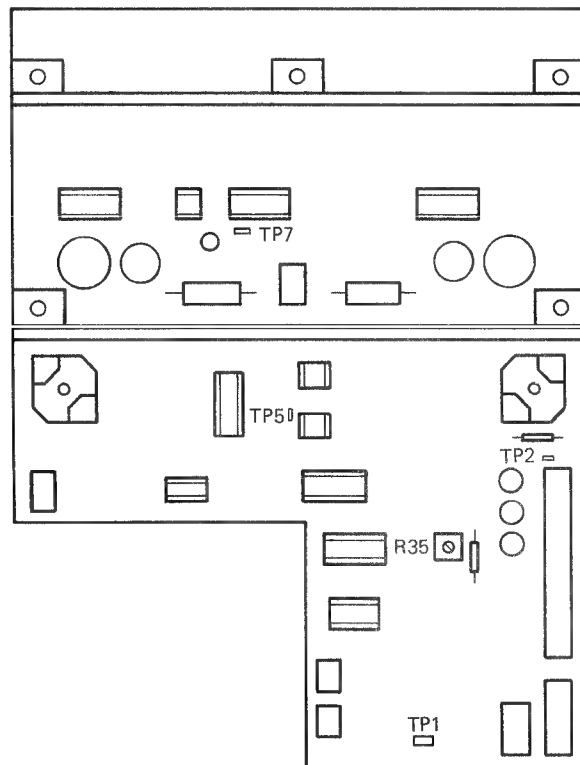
Spooling motor control PCB 1.727.340
